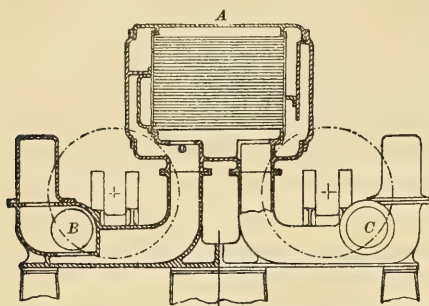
Horizontal Arrangement of Tubes for Return Connecting-rod Engines. A, Tube chamber. B, Air pump. C, Circulating pump.
